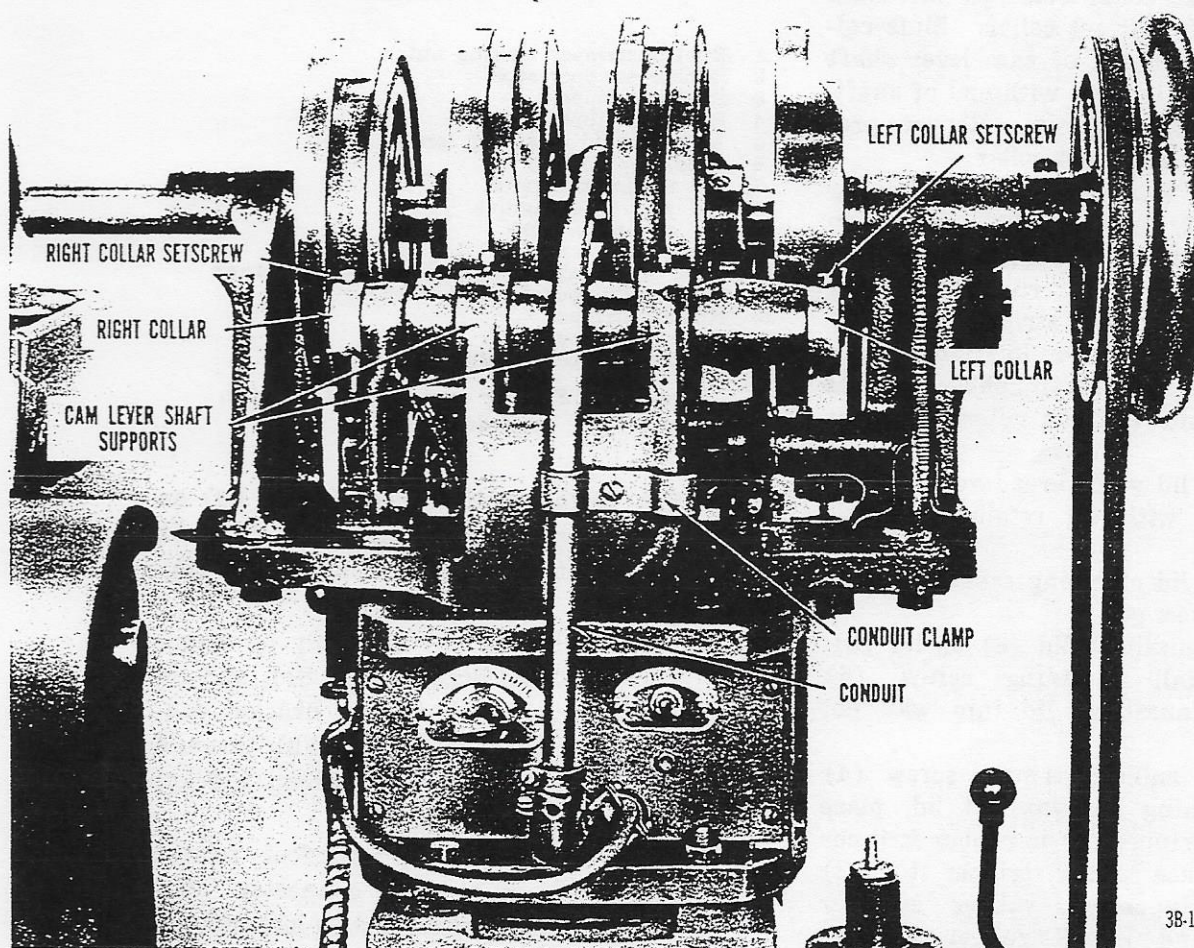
Cam lever shaft set collars installed on cam lever shaft.
